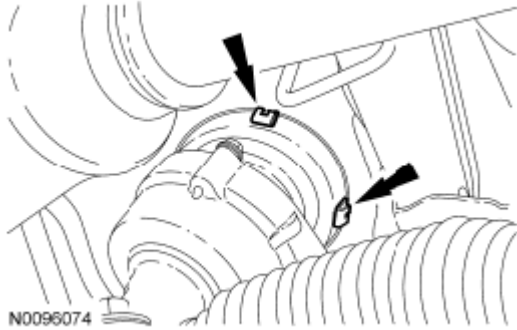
Locating Steering Gear-To-Dash Seal Retaining Clips
